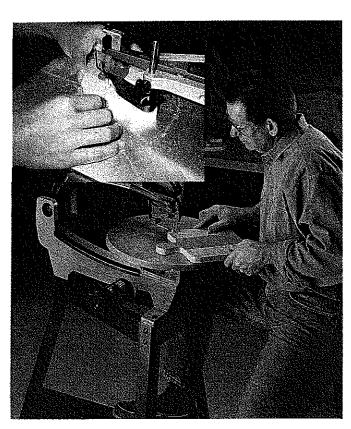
Making detailed internal cuts. Note the hand position in the insert. (Delta International Machinery Corp.)
